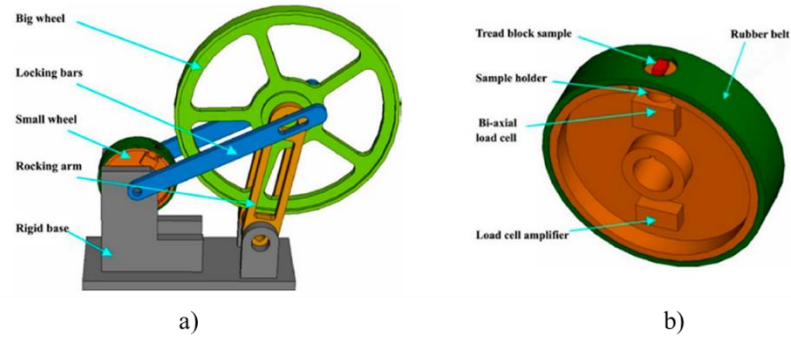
a) Rolling test rig; b) main component of driving wheel [143]
